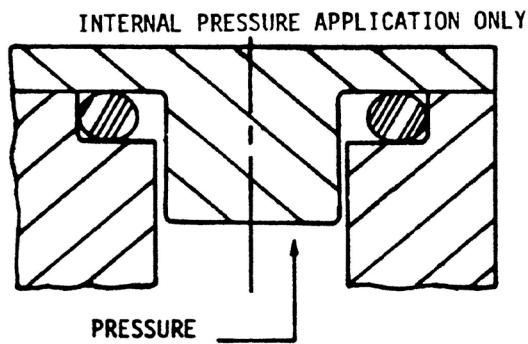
B - O-Ring Seal Axial Glands Alternate Design
